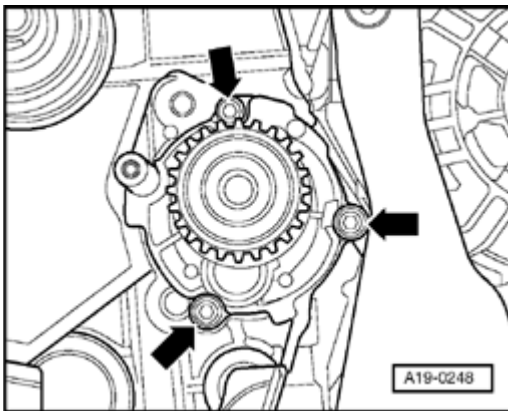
Removing Bolts Securing Coolant Pump And Coolant Pump
